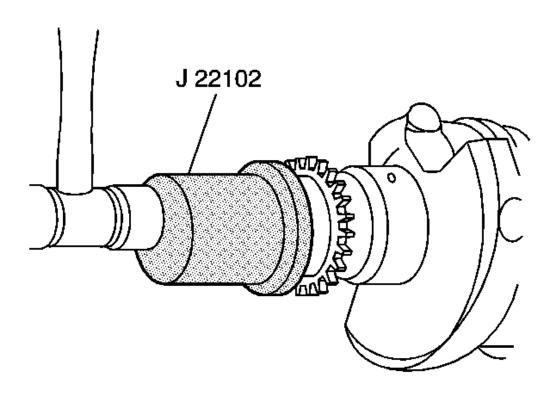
Installing Crankshaft Sprocket Using J 22102 Courtesy of GENERAL MOTORS CORP.
